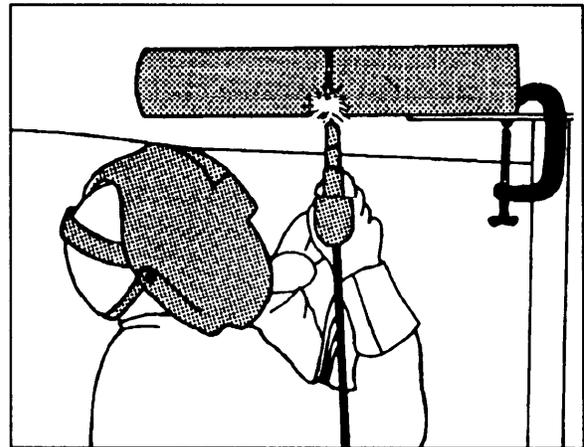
GMA gun manipulation for welding pipe in the horizontal fixed position.
